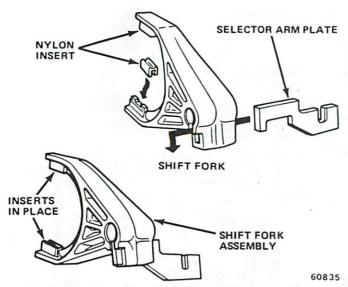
B-28 Assembling Shift Forks and Selector Arm Plates
